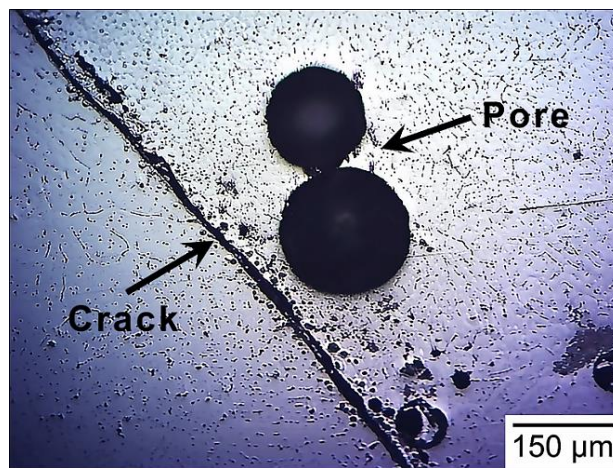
6061 plates welded with Al-1wt% NbB₂ filler.
